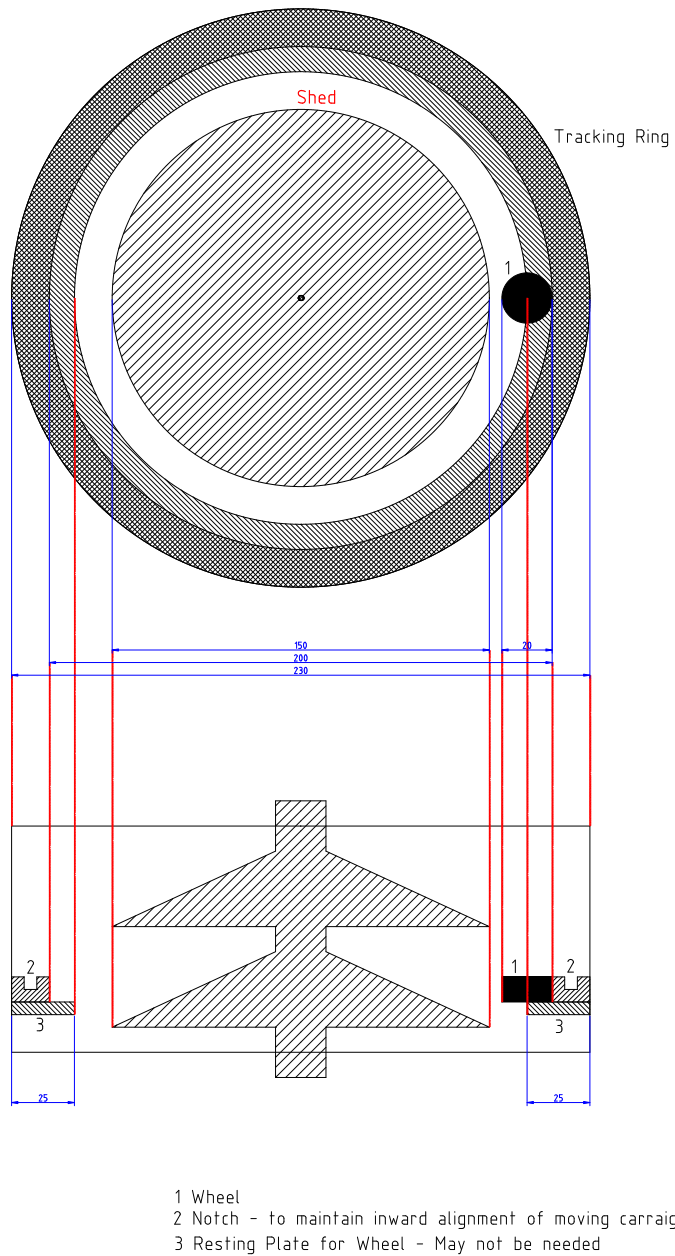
Engineering drawing of proposed circular tracking mechanism
